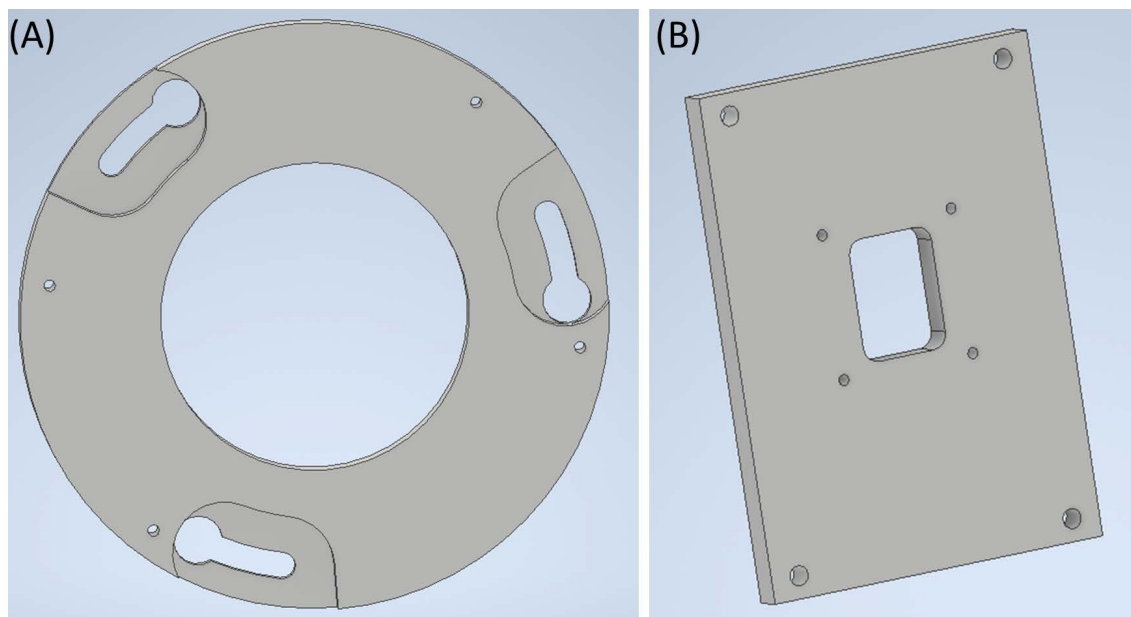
(A) Princeton-to-Andor adapter that allows us to mount the Andor camera to the Princeton spectrometer. It is machined out of stainless steel. (B) 30 mm cage plate adapter for the rectangular slit mounts on the Princeton. These were machined out of aluminum and the four holes have 4-40 taps.
